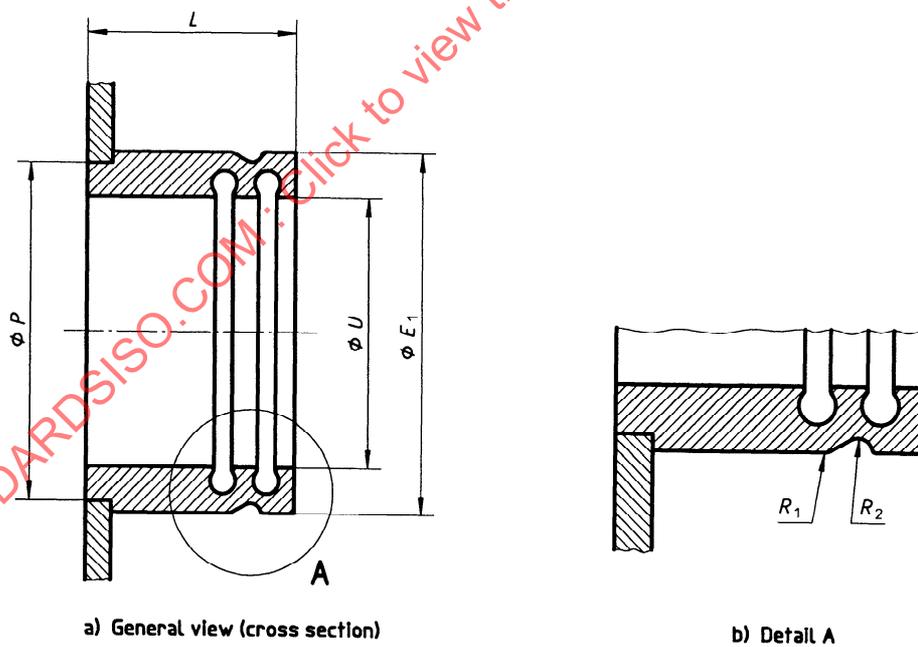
Example and dimensions of welded glove/bag port having two internal and one external groove
